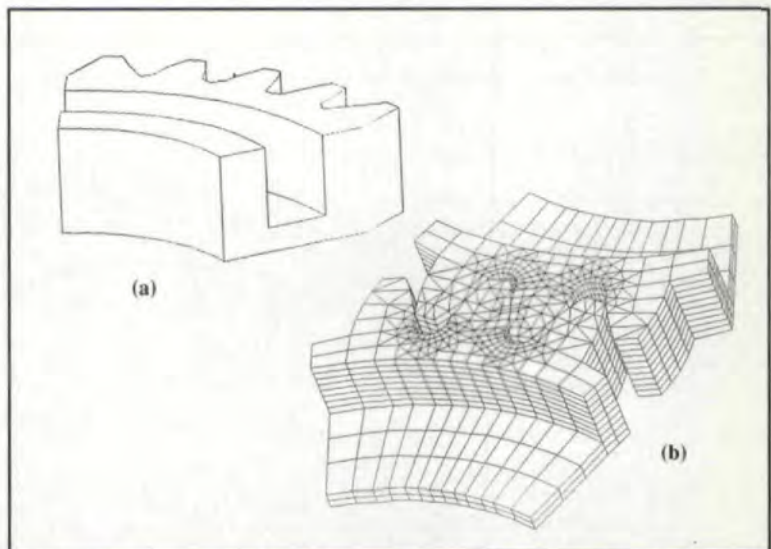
(a) Half model for nonmetallic gears; (b) model of gear tooth contact.
